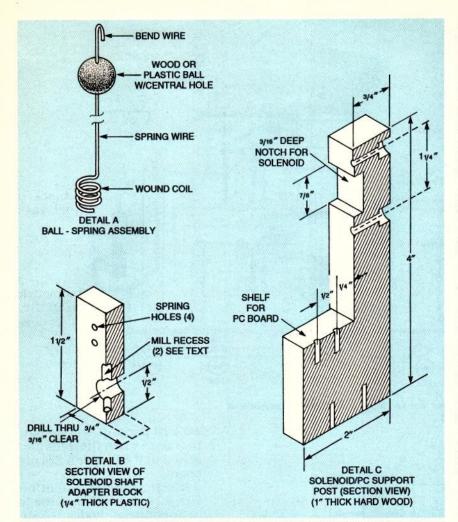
DETAILS OF MECHANICAL PARTS: ball-spring assembly (Detail A); solenoid shaft adapter block (Detail B); solenoid/PCB support post (Detail C).
